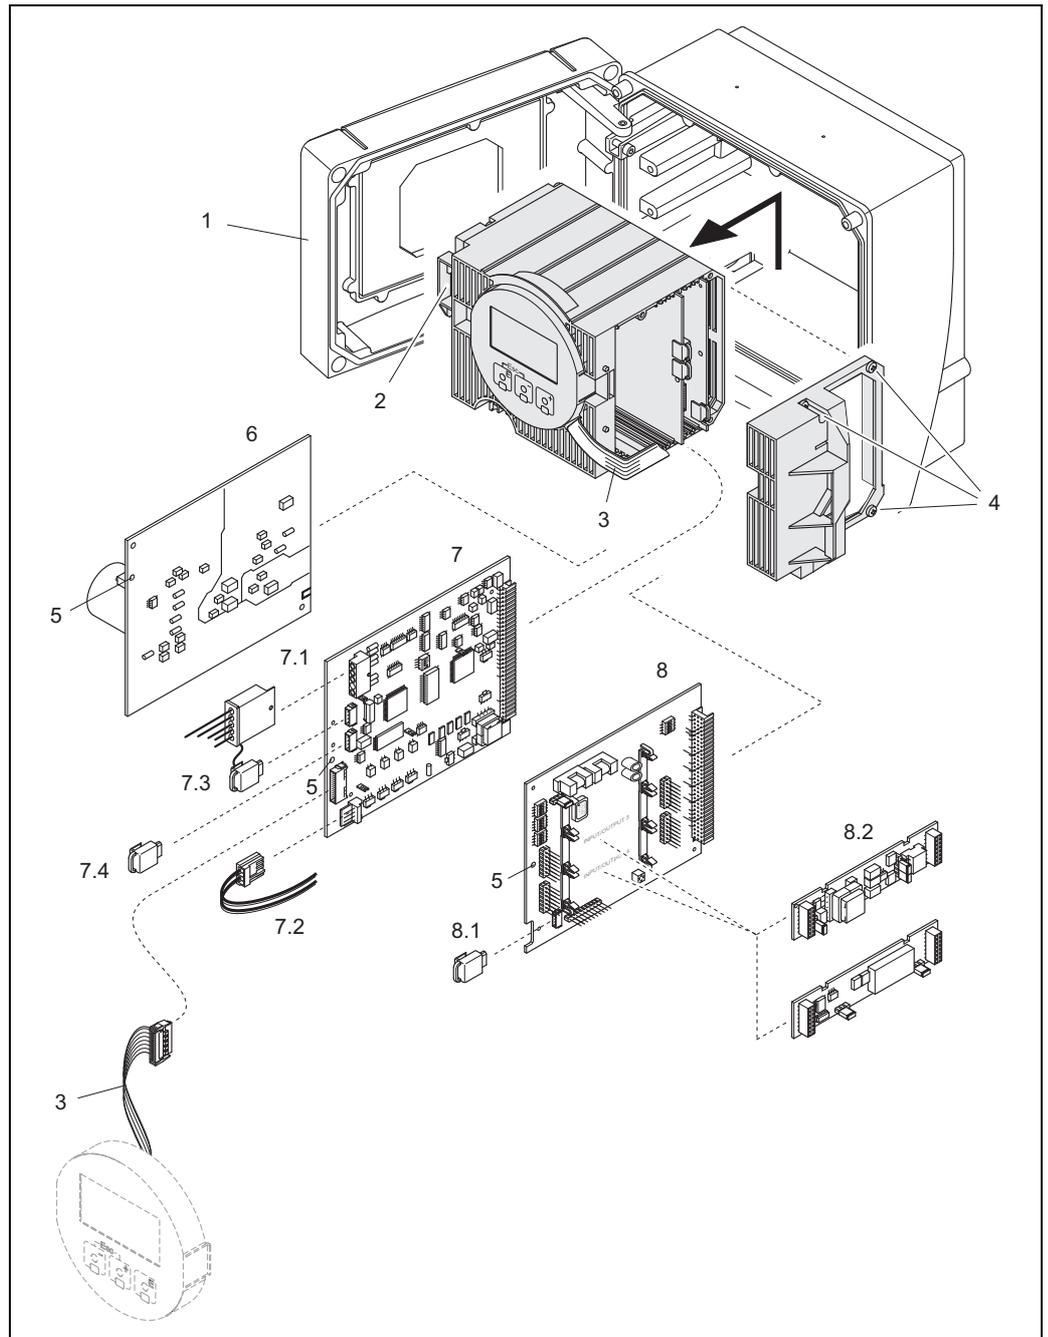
Wall-mount housing: removing and installing printed circuit boards
